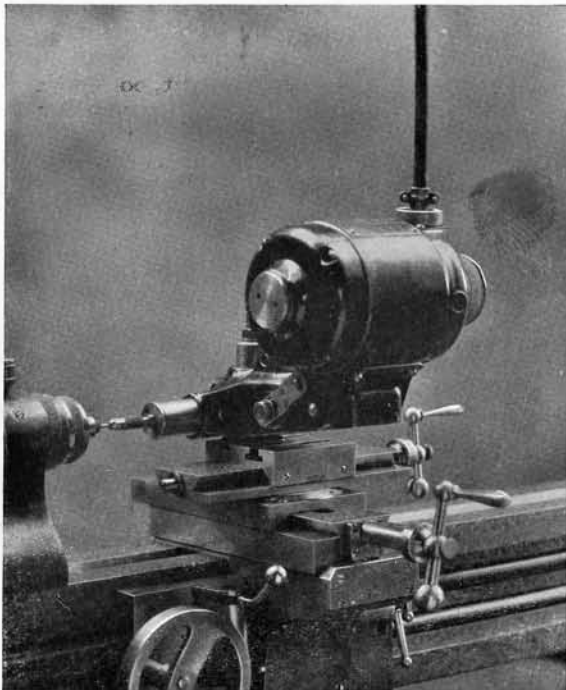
Unit Motor Drive Slide Rest Grinding Attachment mounted on top slide of rocker tool post slide rest, with internal quill and chuck for wheel mounts
